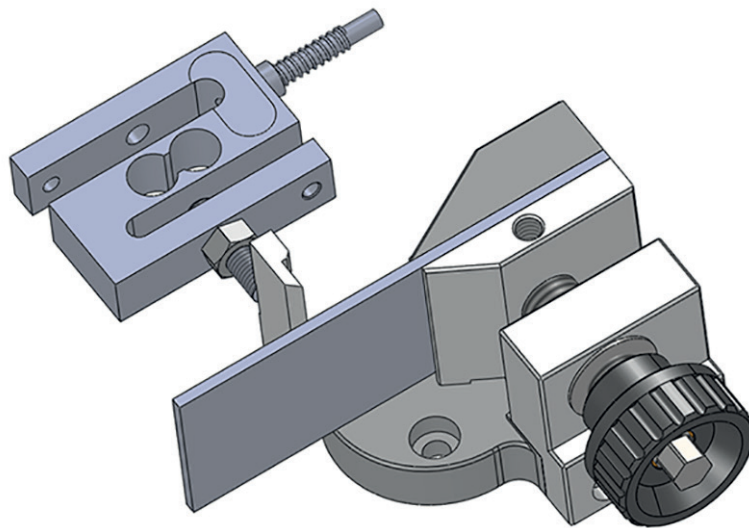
3 D drawing of clamping jaws with specimen, load cell and bar
